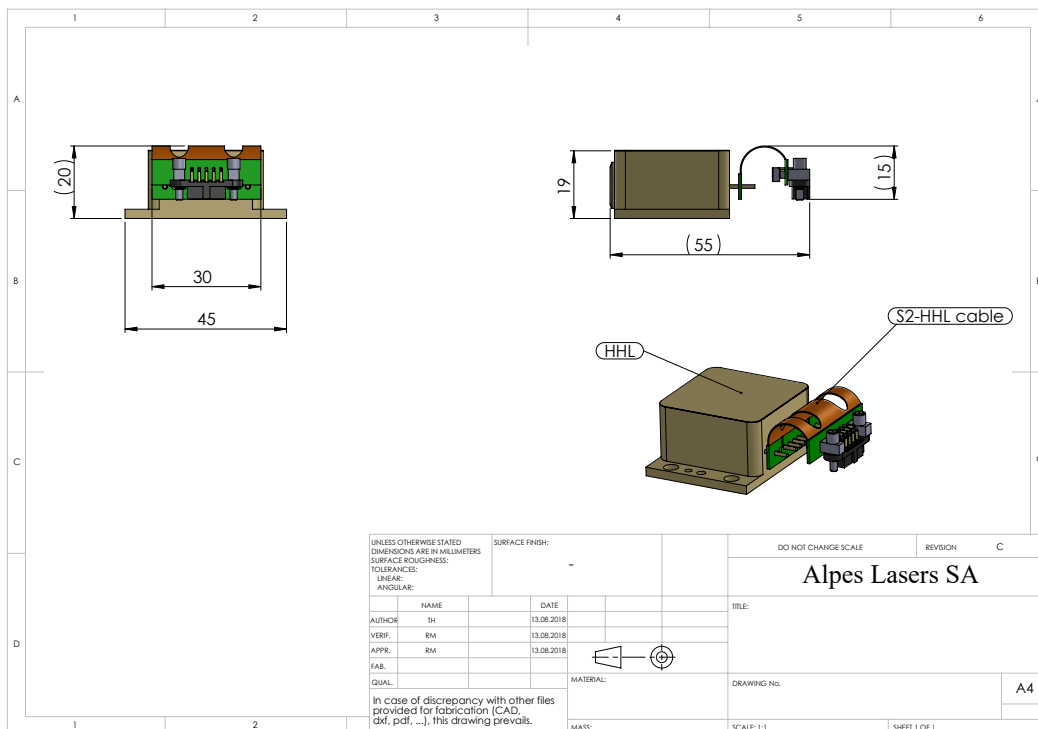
HHL-packaged QCL with flex cable for attachment to the S-2m
